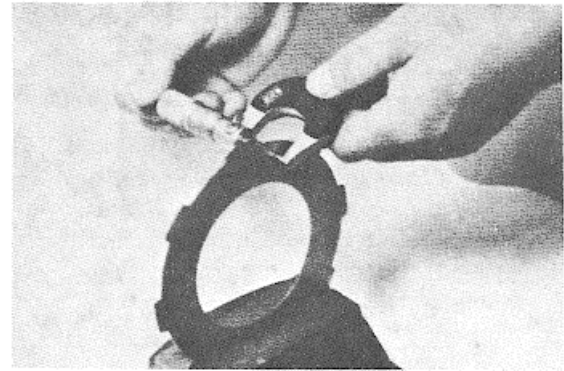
Measuring Clutch Steel Disk Thickness
